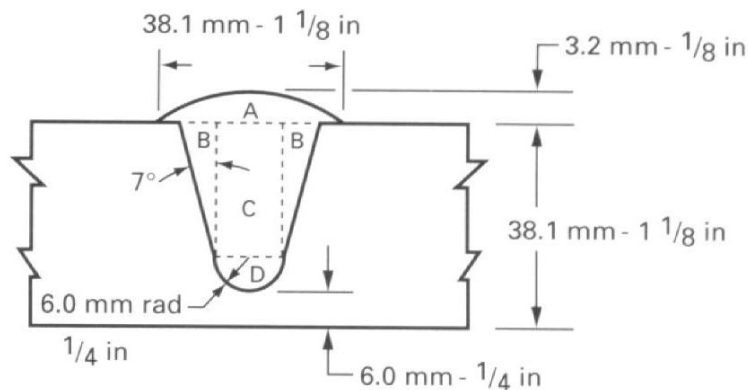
Weld cross section used to illustrate procedure for calculating weight of weld metal in Table 3
